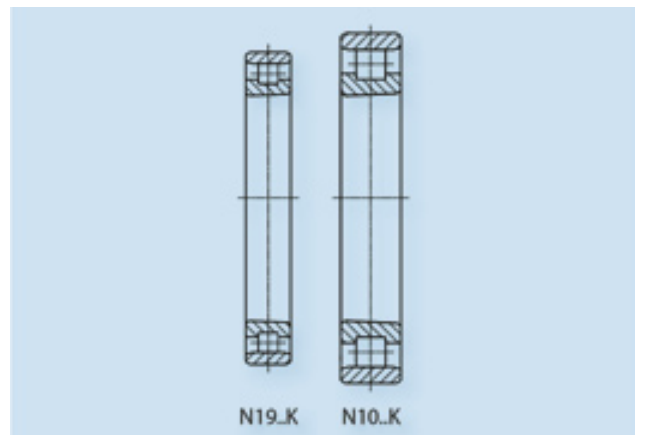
Series of high-precision single row cylindrical roller bearings
